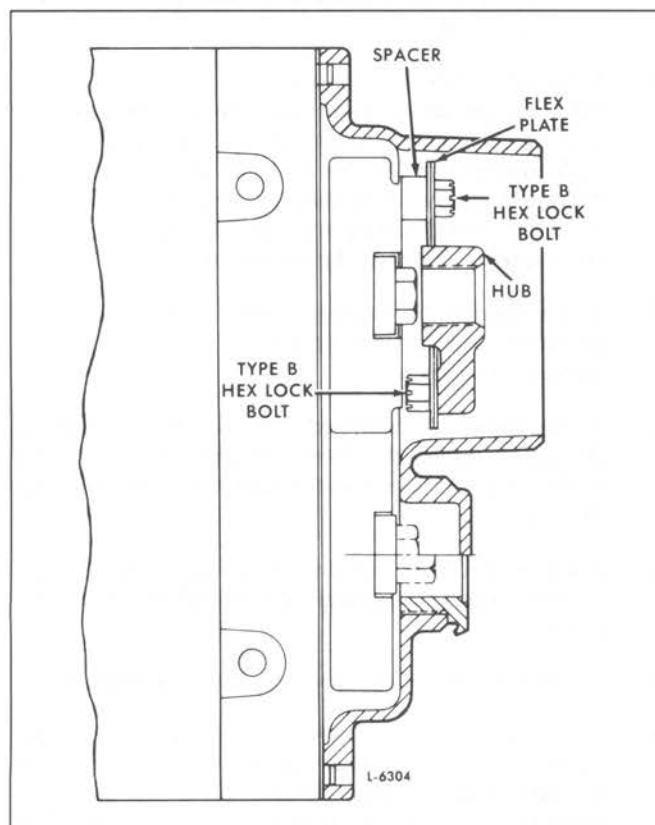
Front Hub Assembly – Large Bearing Blowers
